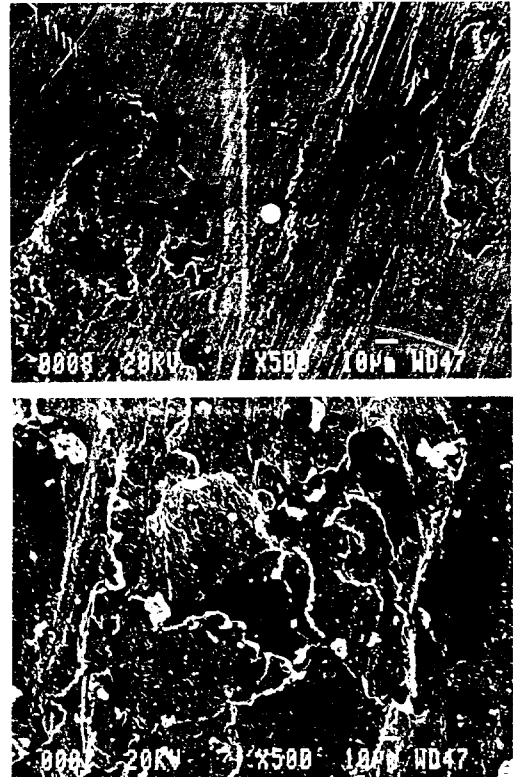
Micrographs of the drilling hole surface in drilling ADI and GCD600
